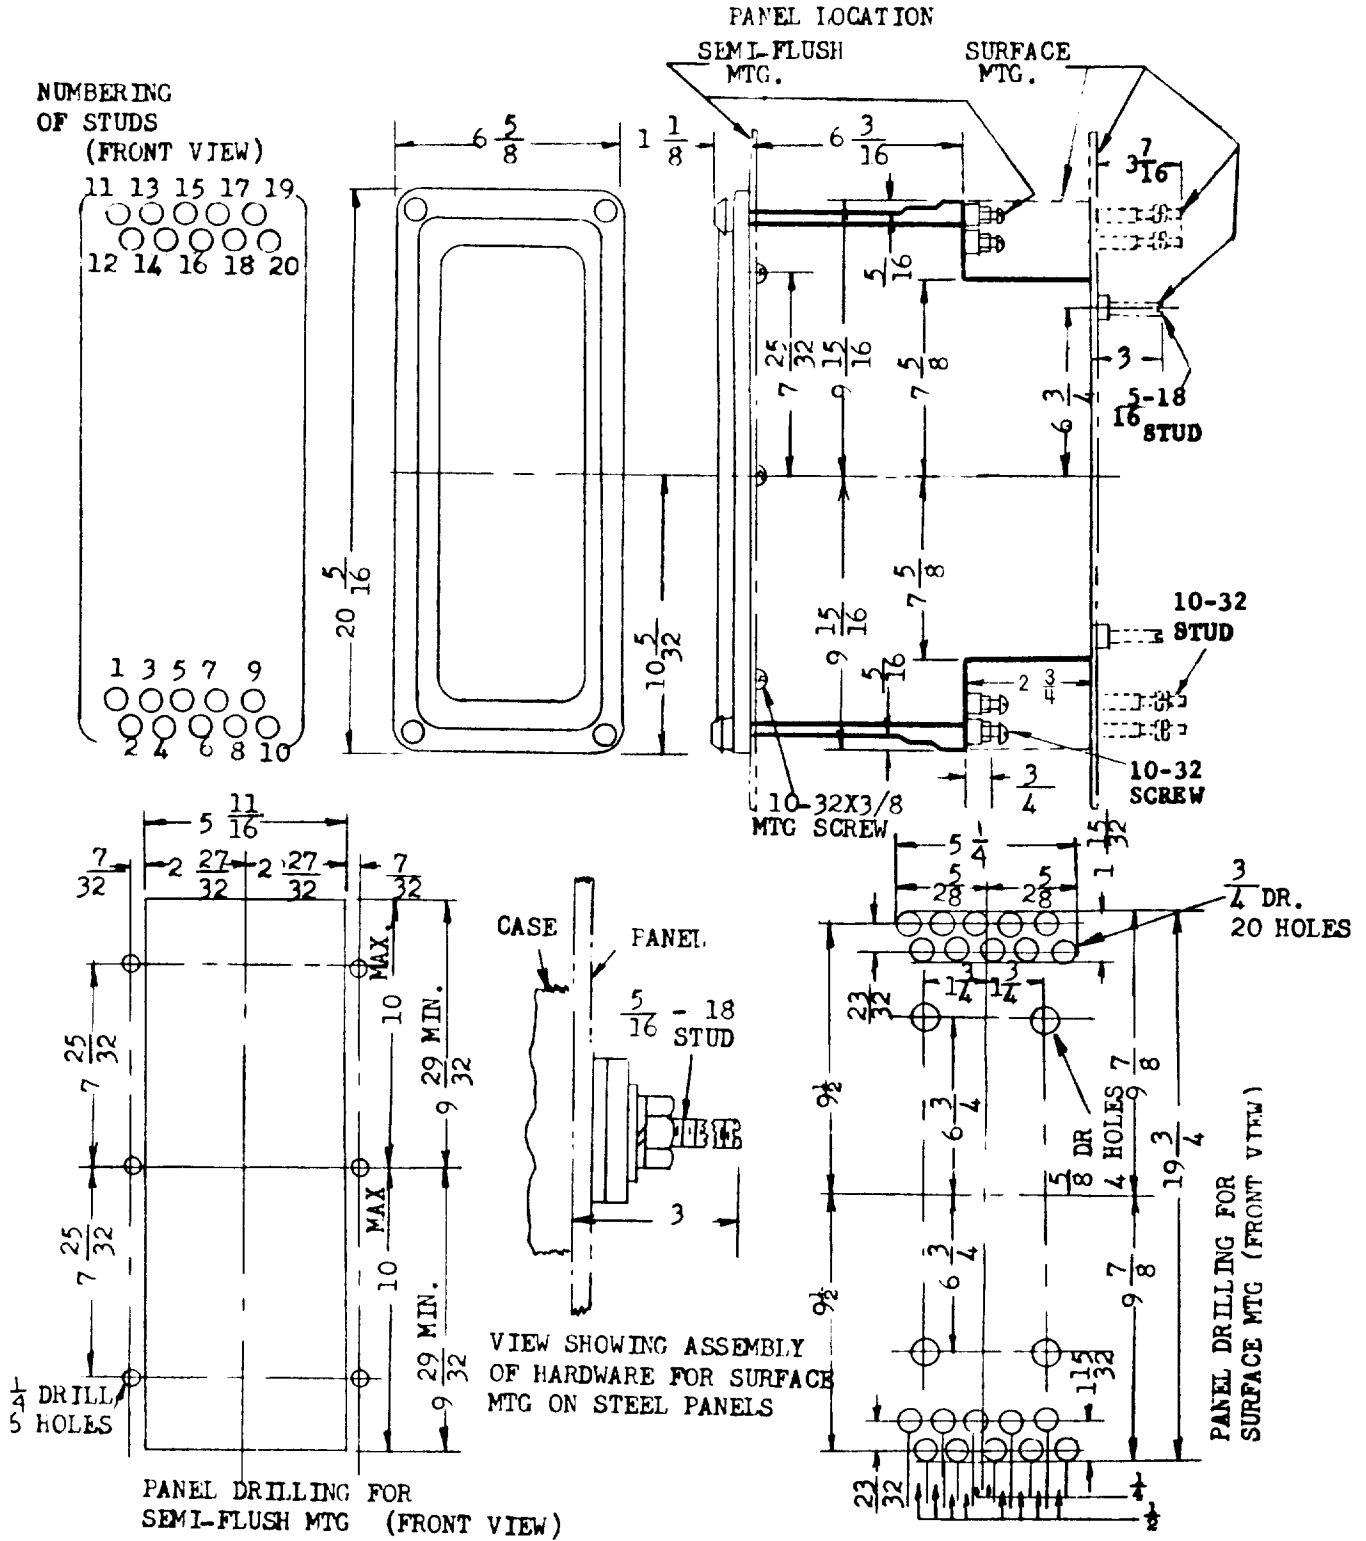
(0178A7336-2) Outline And Panel Drilling Dimensions For The GCXY51A Relay
